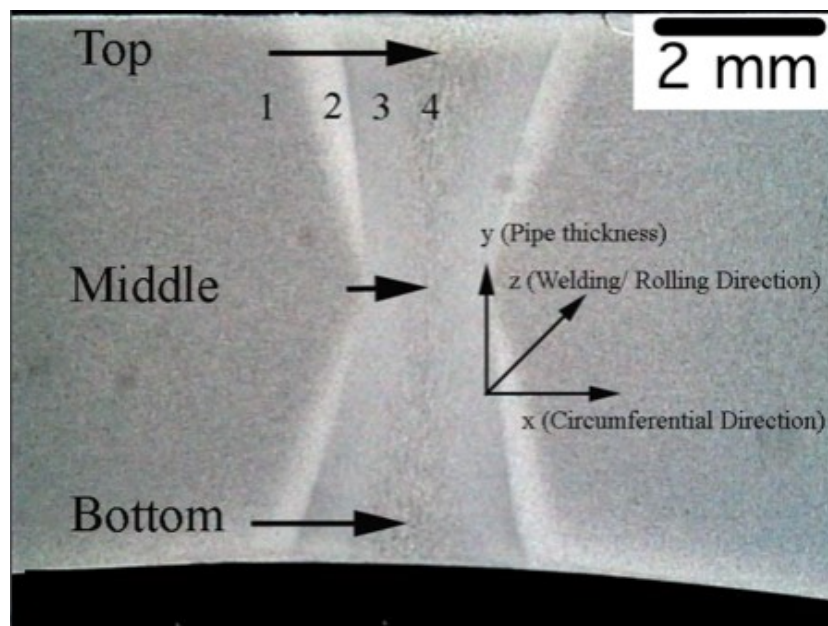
Zones of AW HFI welded pipe weld [2].
